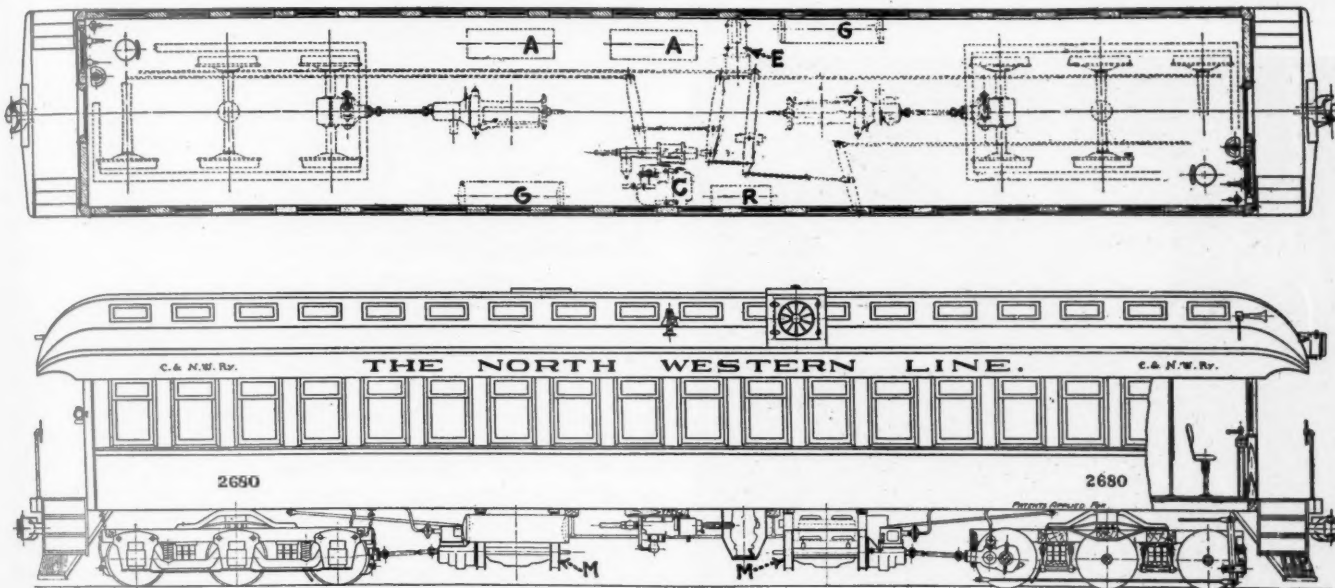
Plan and Elevation Showing Arrangement for Double Motor Drive and Controls
